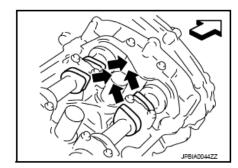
Locating Intake And Exhaust Cam Nose Position On No. 1 Cylinder Courtesy of NISSAN NORTH AMERICA, INC.
